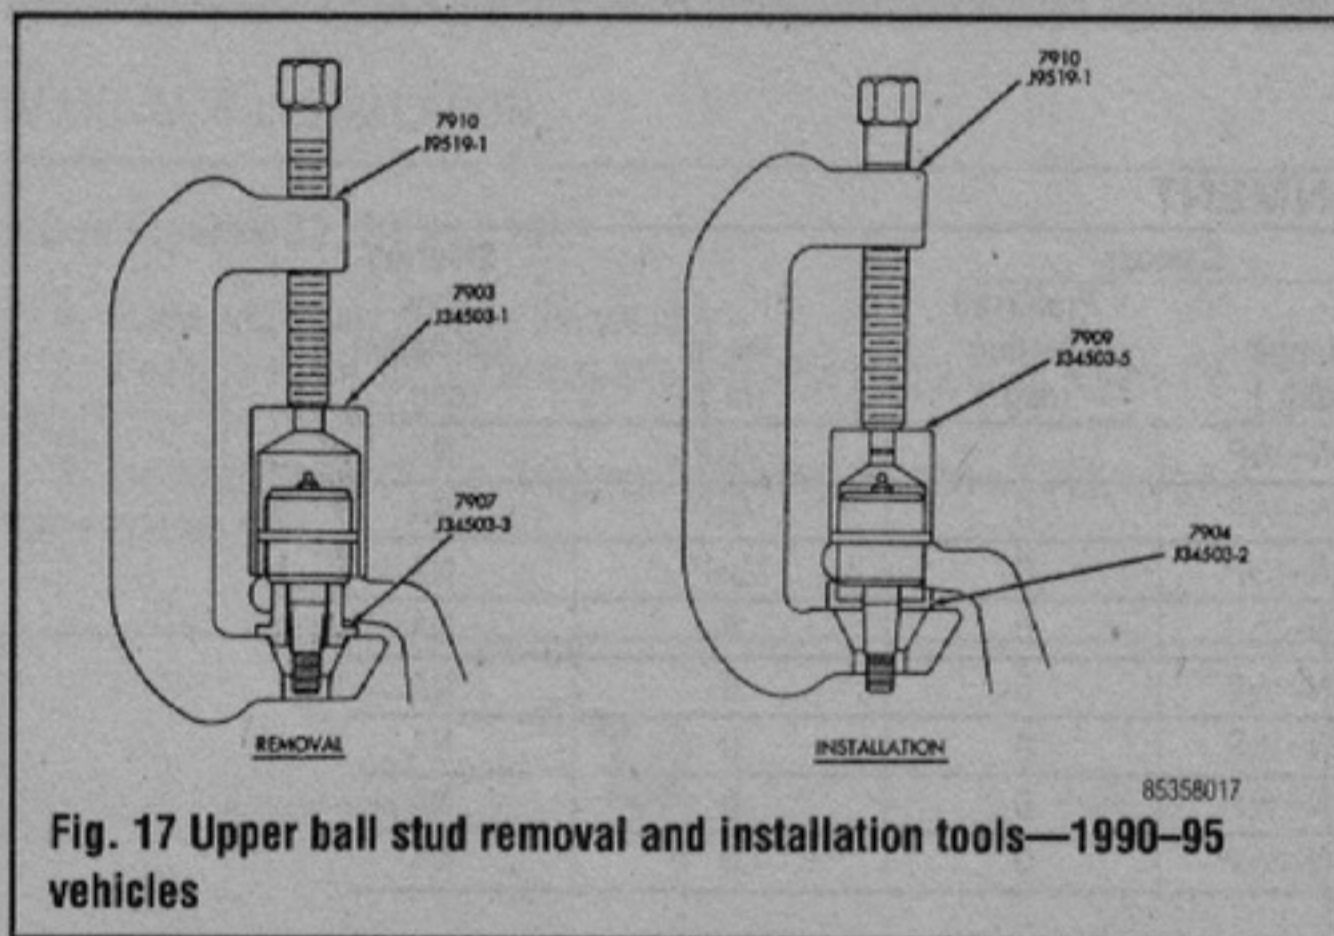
Upper ball stud removal and installation tools—1990-95 vehicles
